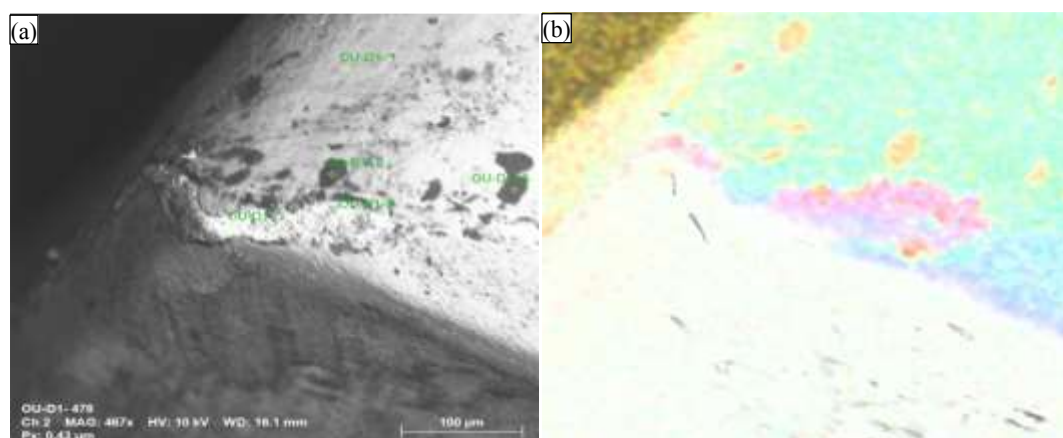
(a), (b) EDS analysis on the plain carbide inserts after machining the C/C composite.
